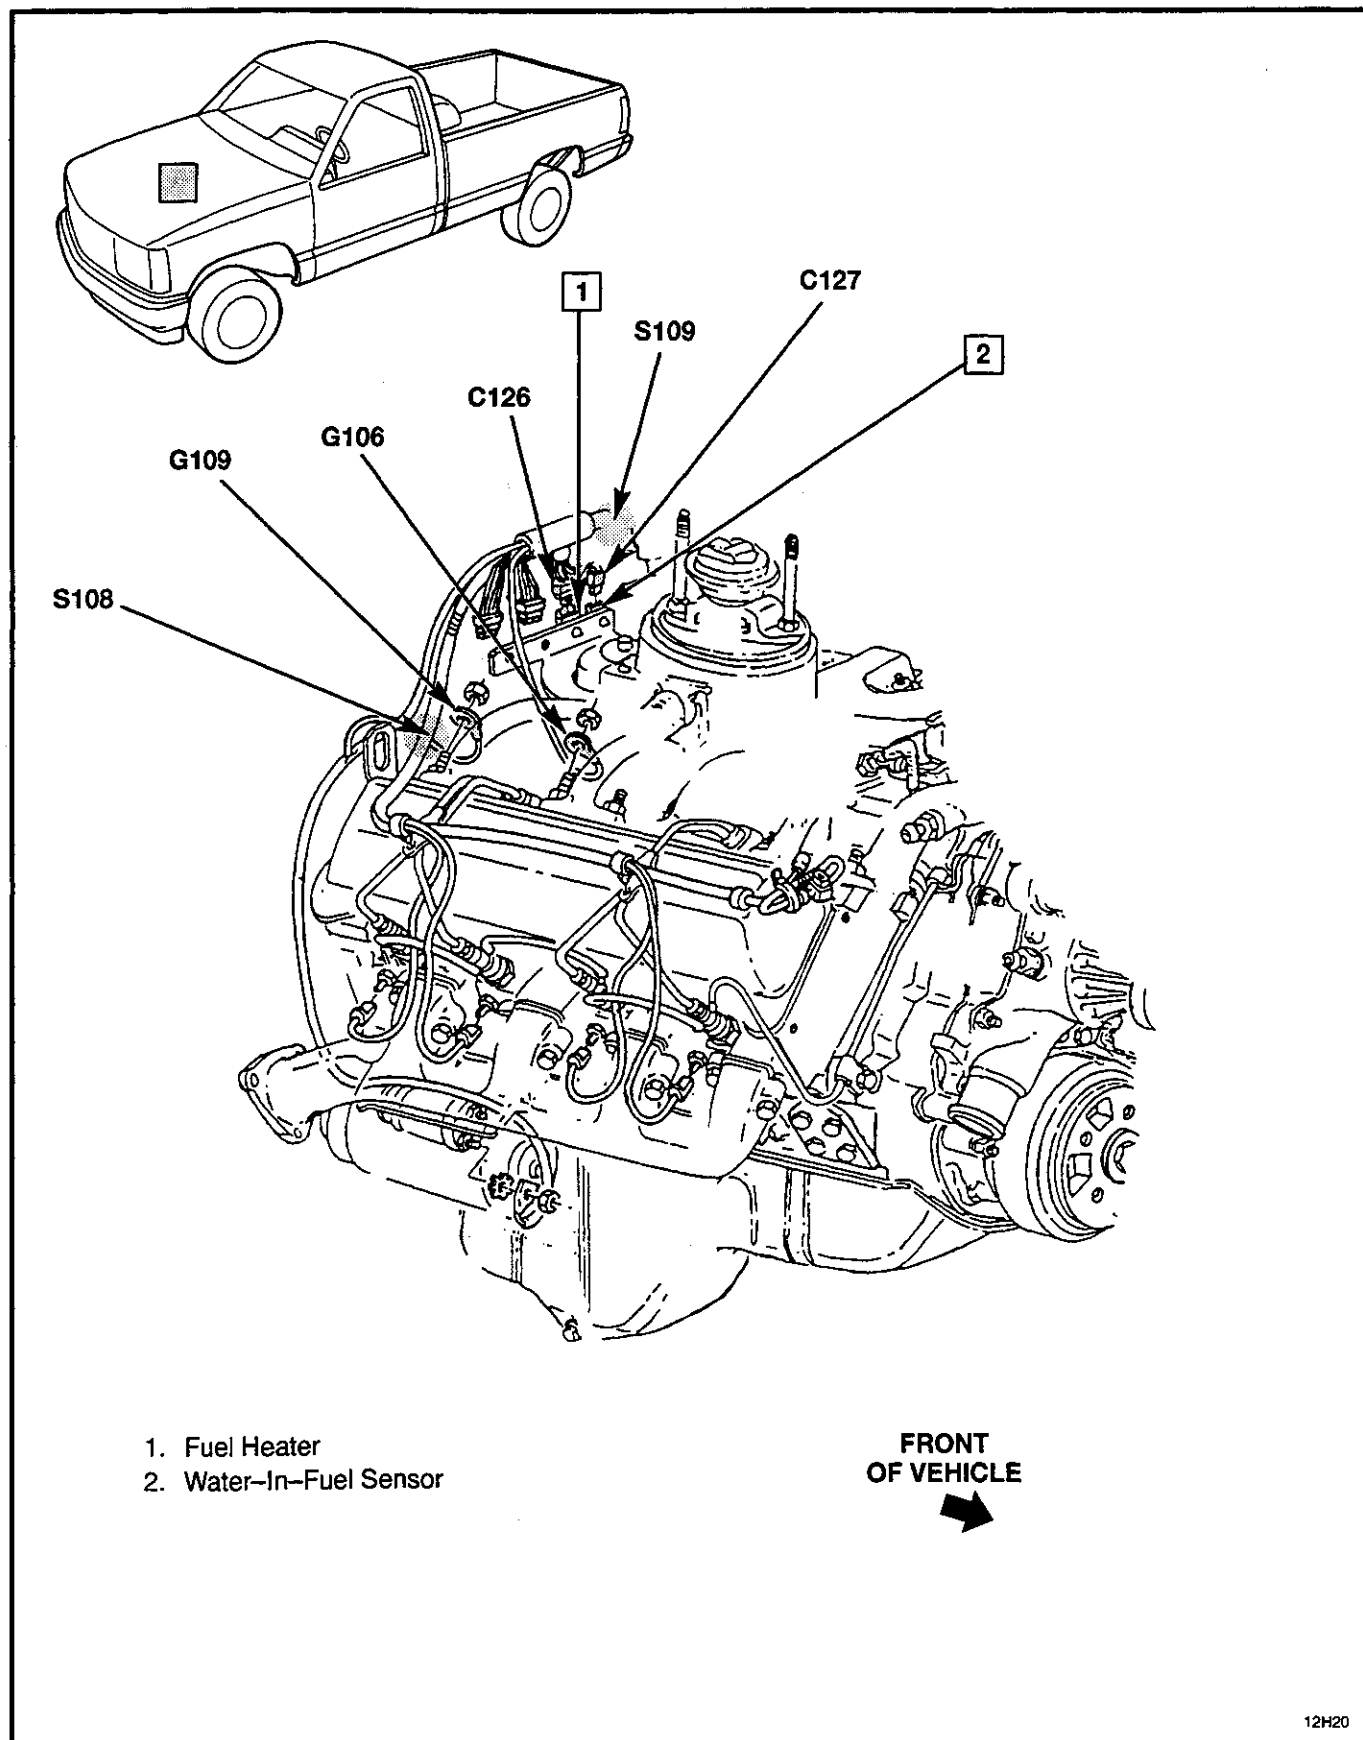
6.5L Diesel Engine Wiring, RH Side
